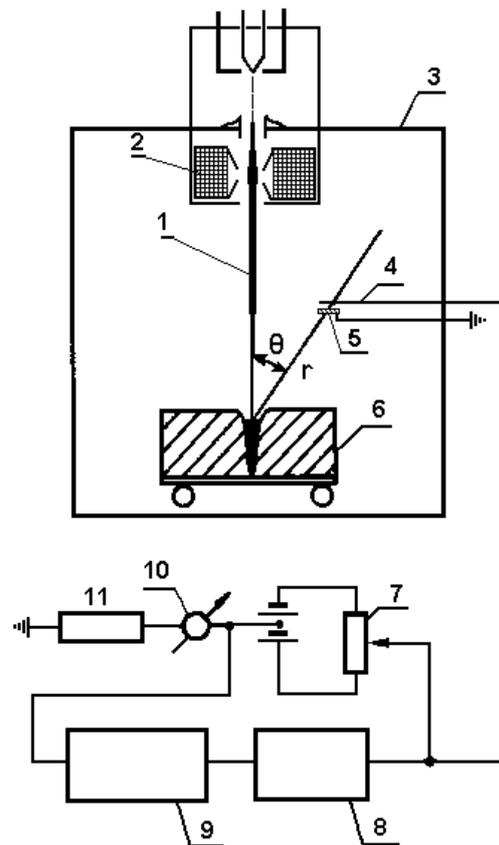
Measurements of plasma parameters during electron beam welding [4]
